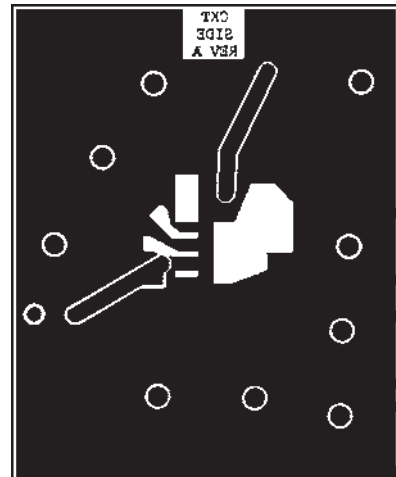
EVAL-AD8174EB Board Layout (Solder Side)
